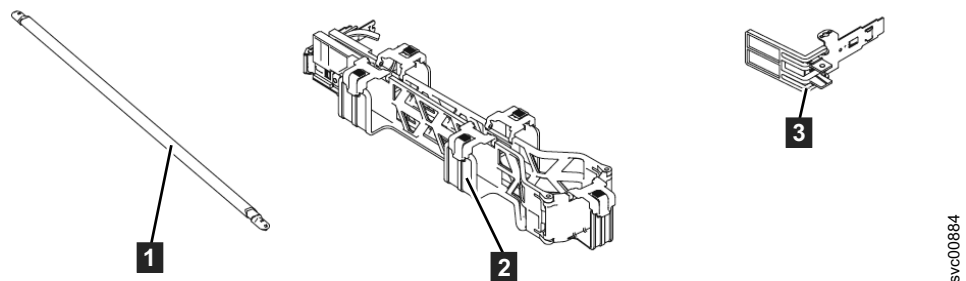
Parts for installing the SAN Volume Controller 2145-DH8 cable management arm assembly
